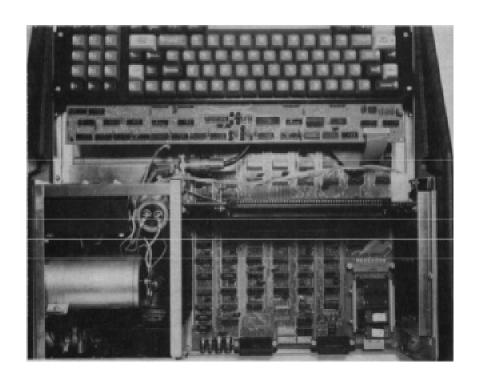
Backplane board (Sol-BPB) installation. Rear of Sol is at bottom and Sol-BPB is to right of power supply subchassis in line with C8 and transformer.
